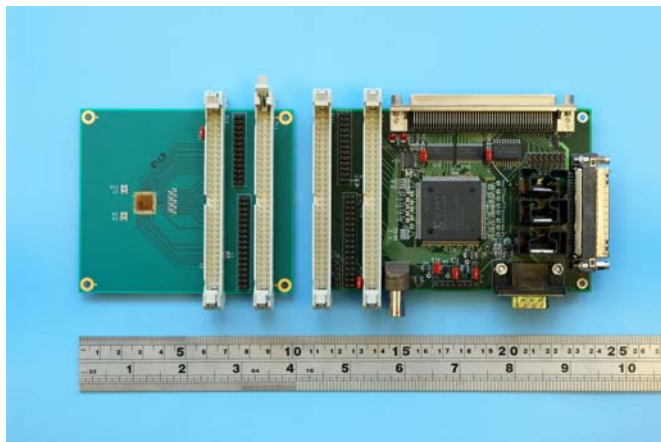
ABCN-25 Bonded Chip and Custom Driver PCBs
